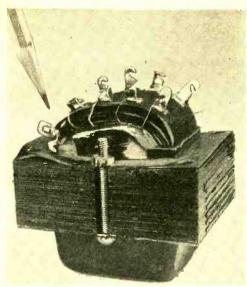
Check terminal connections for "open" and "solder bridges," as shown in photograph.
